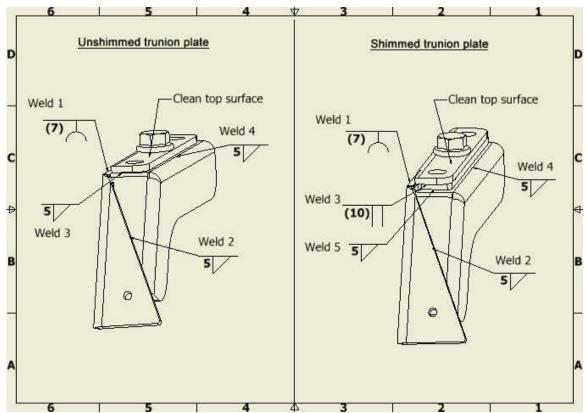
Welding instruction for both shimmed and unshimmed trunion plate.
